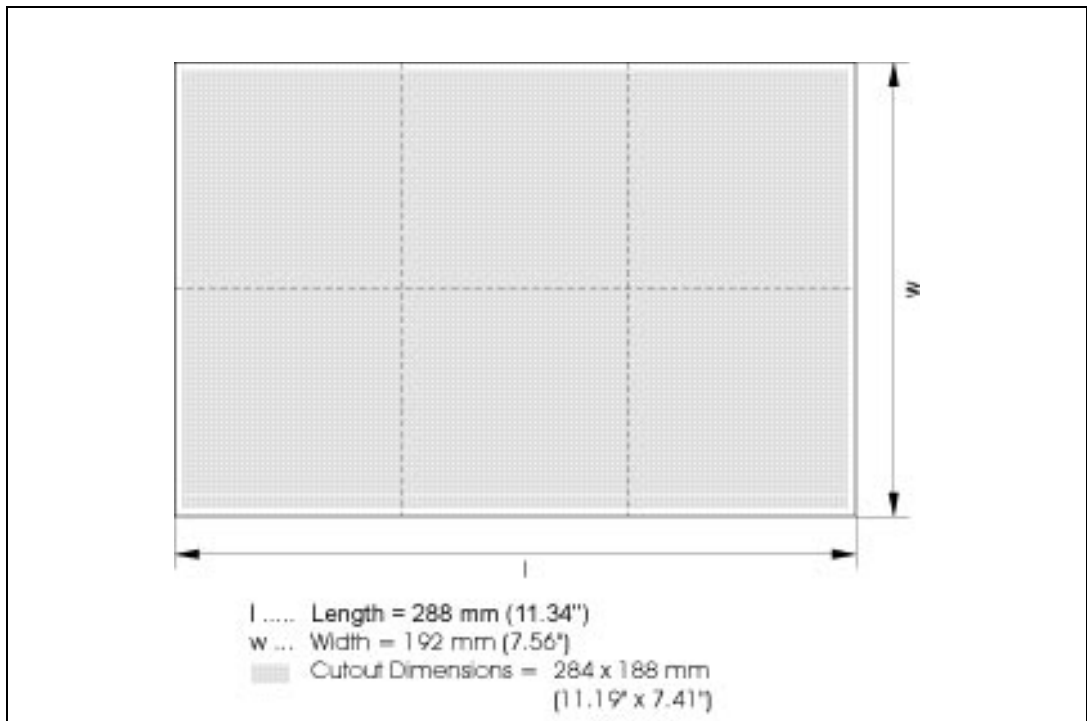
1. Cutout Example for a 2 X 3 Panel
